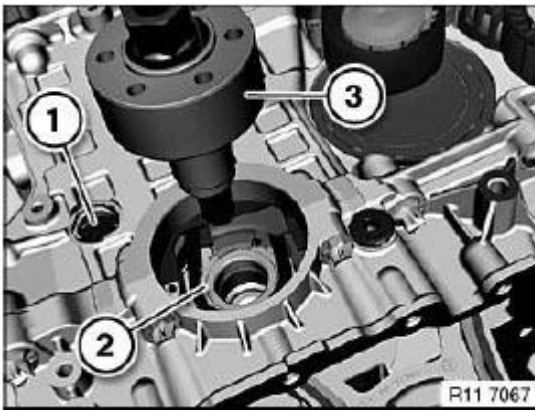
Identifying Bolt, Gear Wheels And Hub
